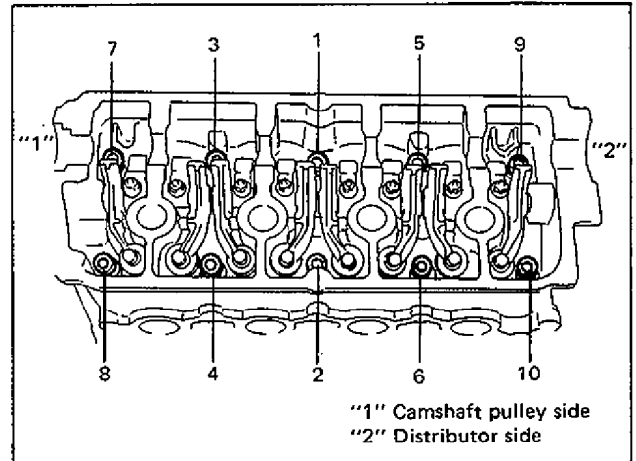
A-105 Tightening Sequence of Cylinder Head Bolts
